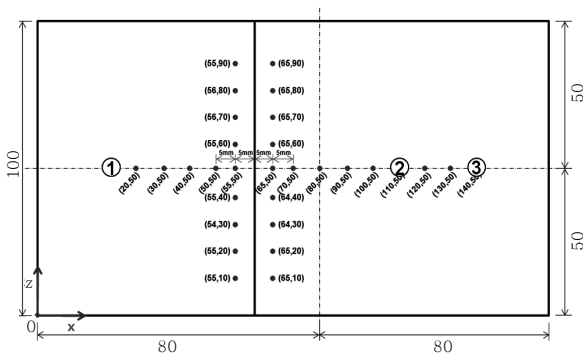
Location information of residual stress measurement for weld specimen
